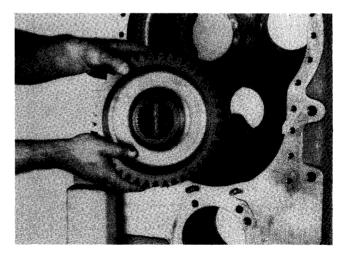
Block output gear. Push or drive output shaft through taper bearing and output gear.
